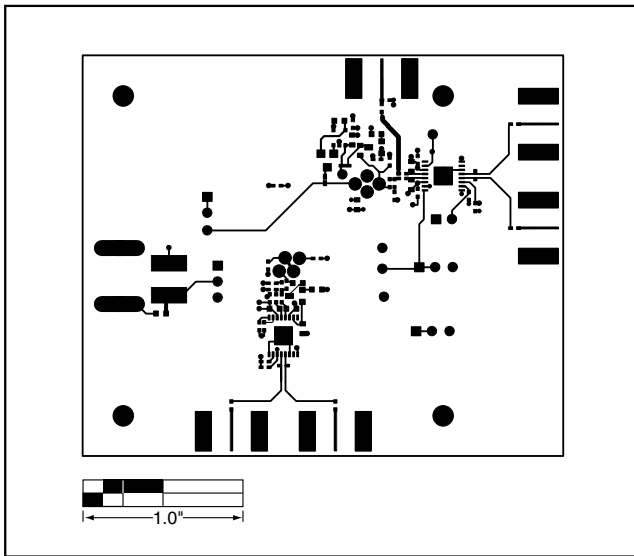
MAX3289 EV Kit PC Board Layout—Component Side
